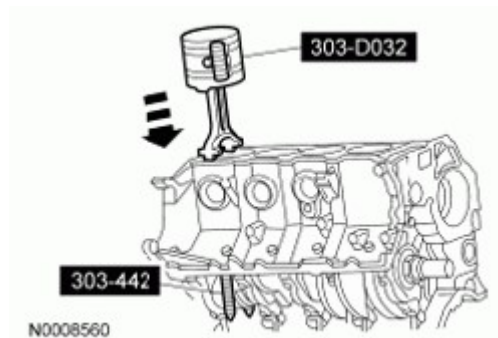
Installing Connecting Rod With Upper Connecting Rod Bearing
